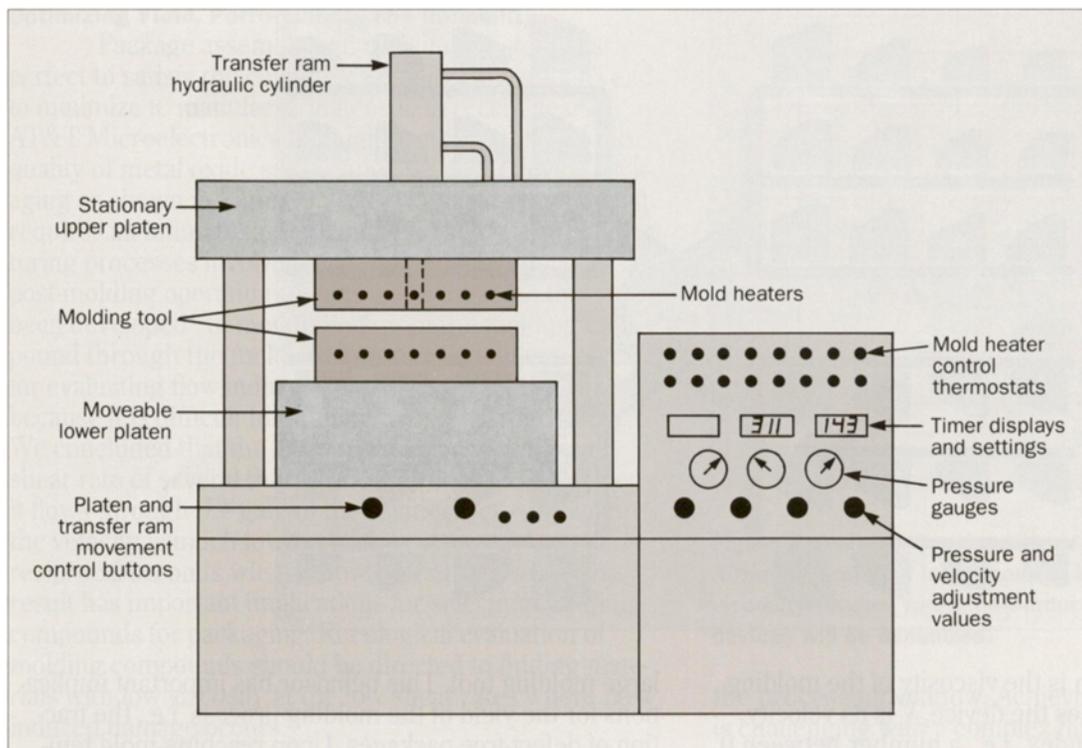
A diagram of the transfer molding machine and molding tool used to manufacture molded plastic packaging.
